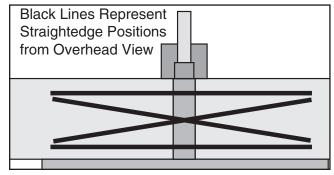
Straightedge positions for checking infeed/outfeed table parallelism.
